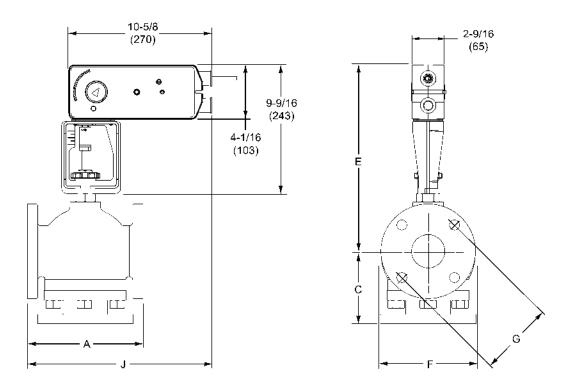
MX61-720X with 2-1/2" to 4" 3-Way Flanged Globe Valve.
